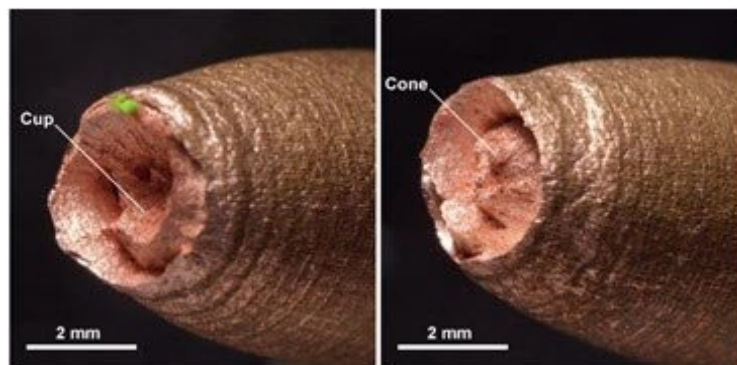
Detail of a cup-cone failure within a manufactured copper rod jumbo.
